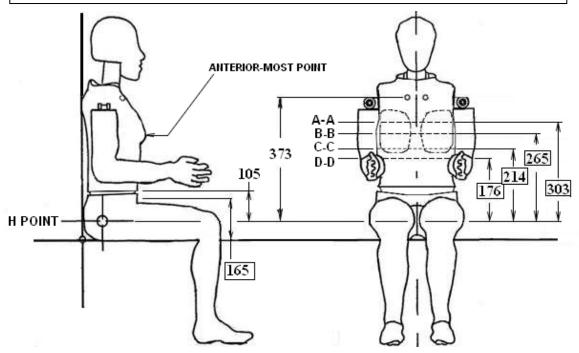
Seated Reference Dimensions (mm) (Adapted from 880105-000, Rev J Sheet 5 of 6, Compete Assembly, 5th Female)
